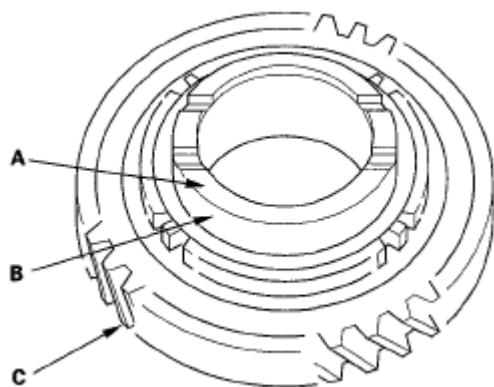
Identifying Thrust Surface, Cone Surface And Gears
